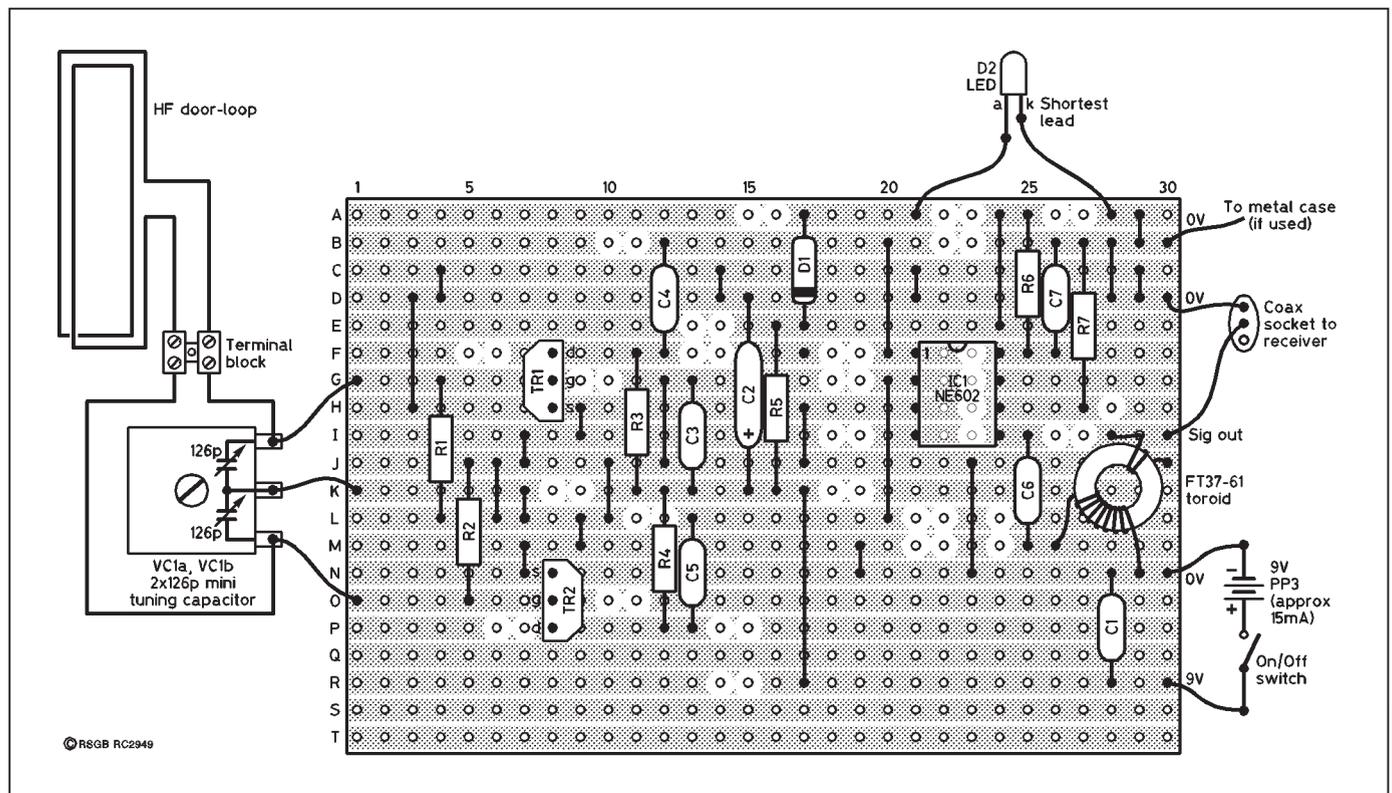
Layout of components on the stripboard, showing connections to off-board components.
